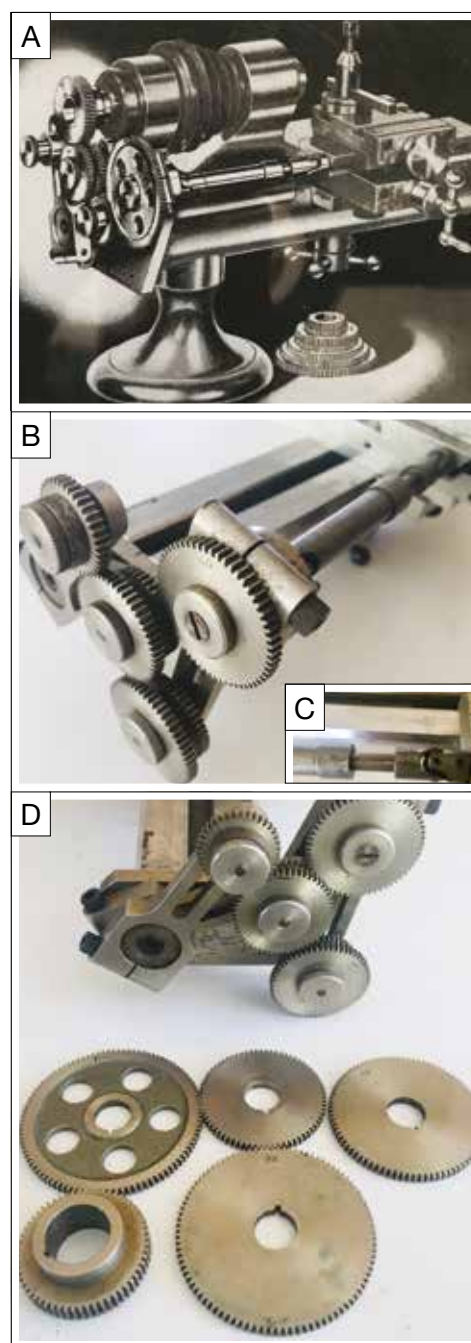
Screw-cutting attachment made by Levin. A is a copy of Figure 94, p69 of the book by Levin and Levin showing their particular design attached to a WW bed lathe.⁴ B is the particular example owned by Eric Pearson. C shows one of the universal linkages and the extensible shaft that connects the output gear to the feed screw on the slide rest. D shows some of the gears used to achieve the ratios to cut various thread pitches.
